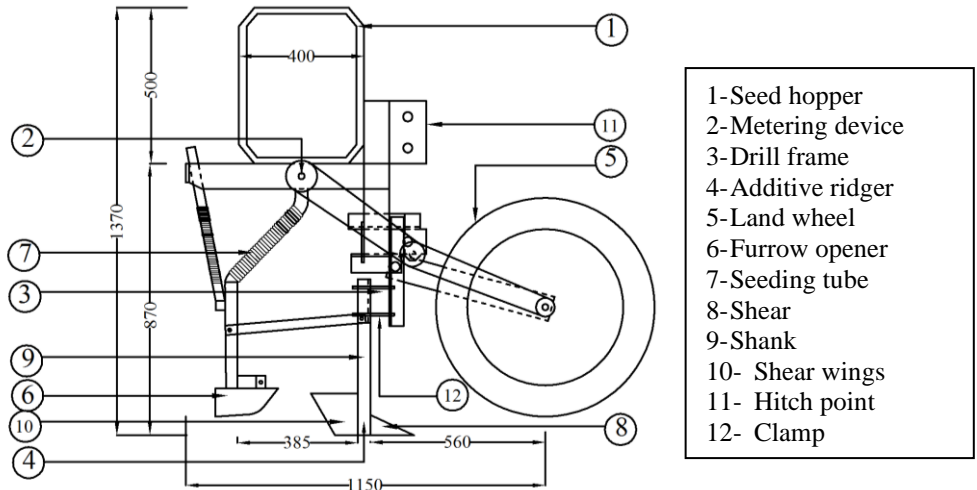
Side view for modified seed drill and dimensions of additive ridger
